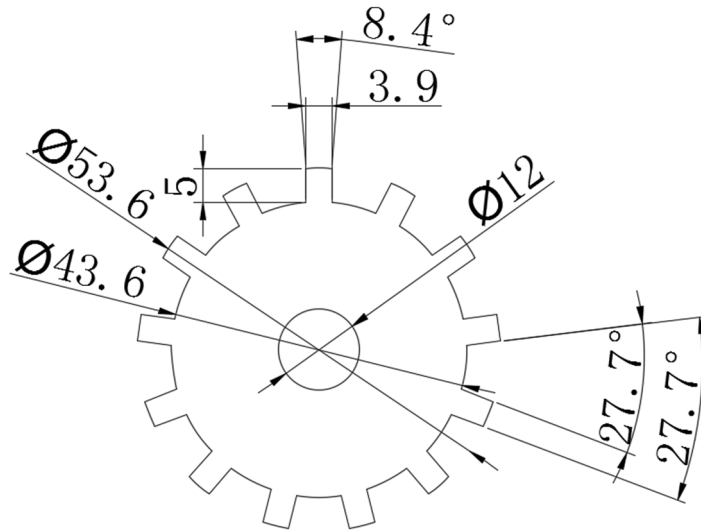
13-pole rotor dimensions for 12/13 FRPM machines.
